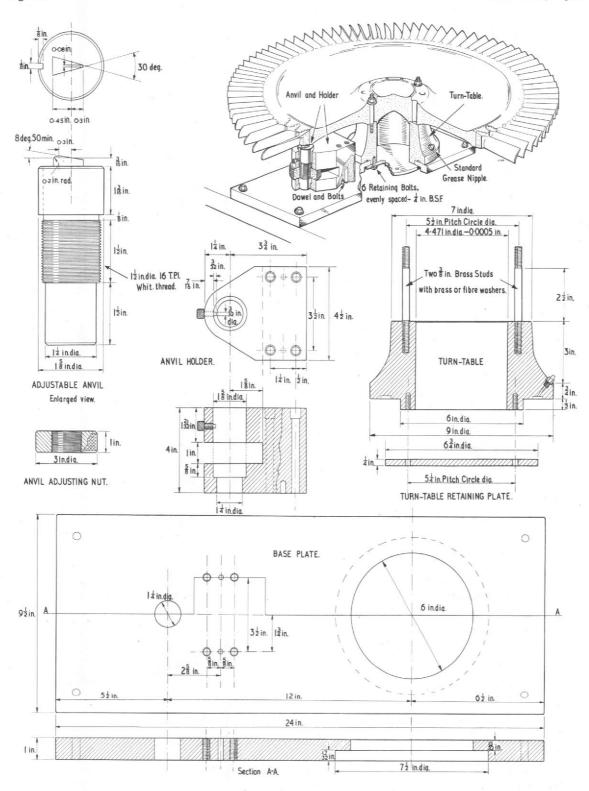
Suggested peening fixture which could be made up where machining facilities are available, and where the number of engines in service warrants this. The overall conception of this fixture is a general one and, provided that the critical dimensions are adhered to, the suggested design, sizes, and materials may be modified to suit individual circumstances and the most suitable material available.
